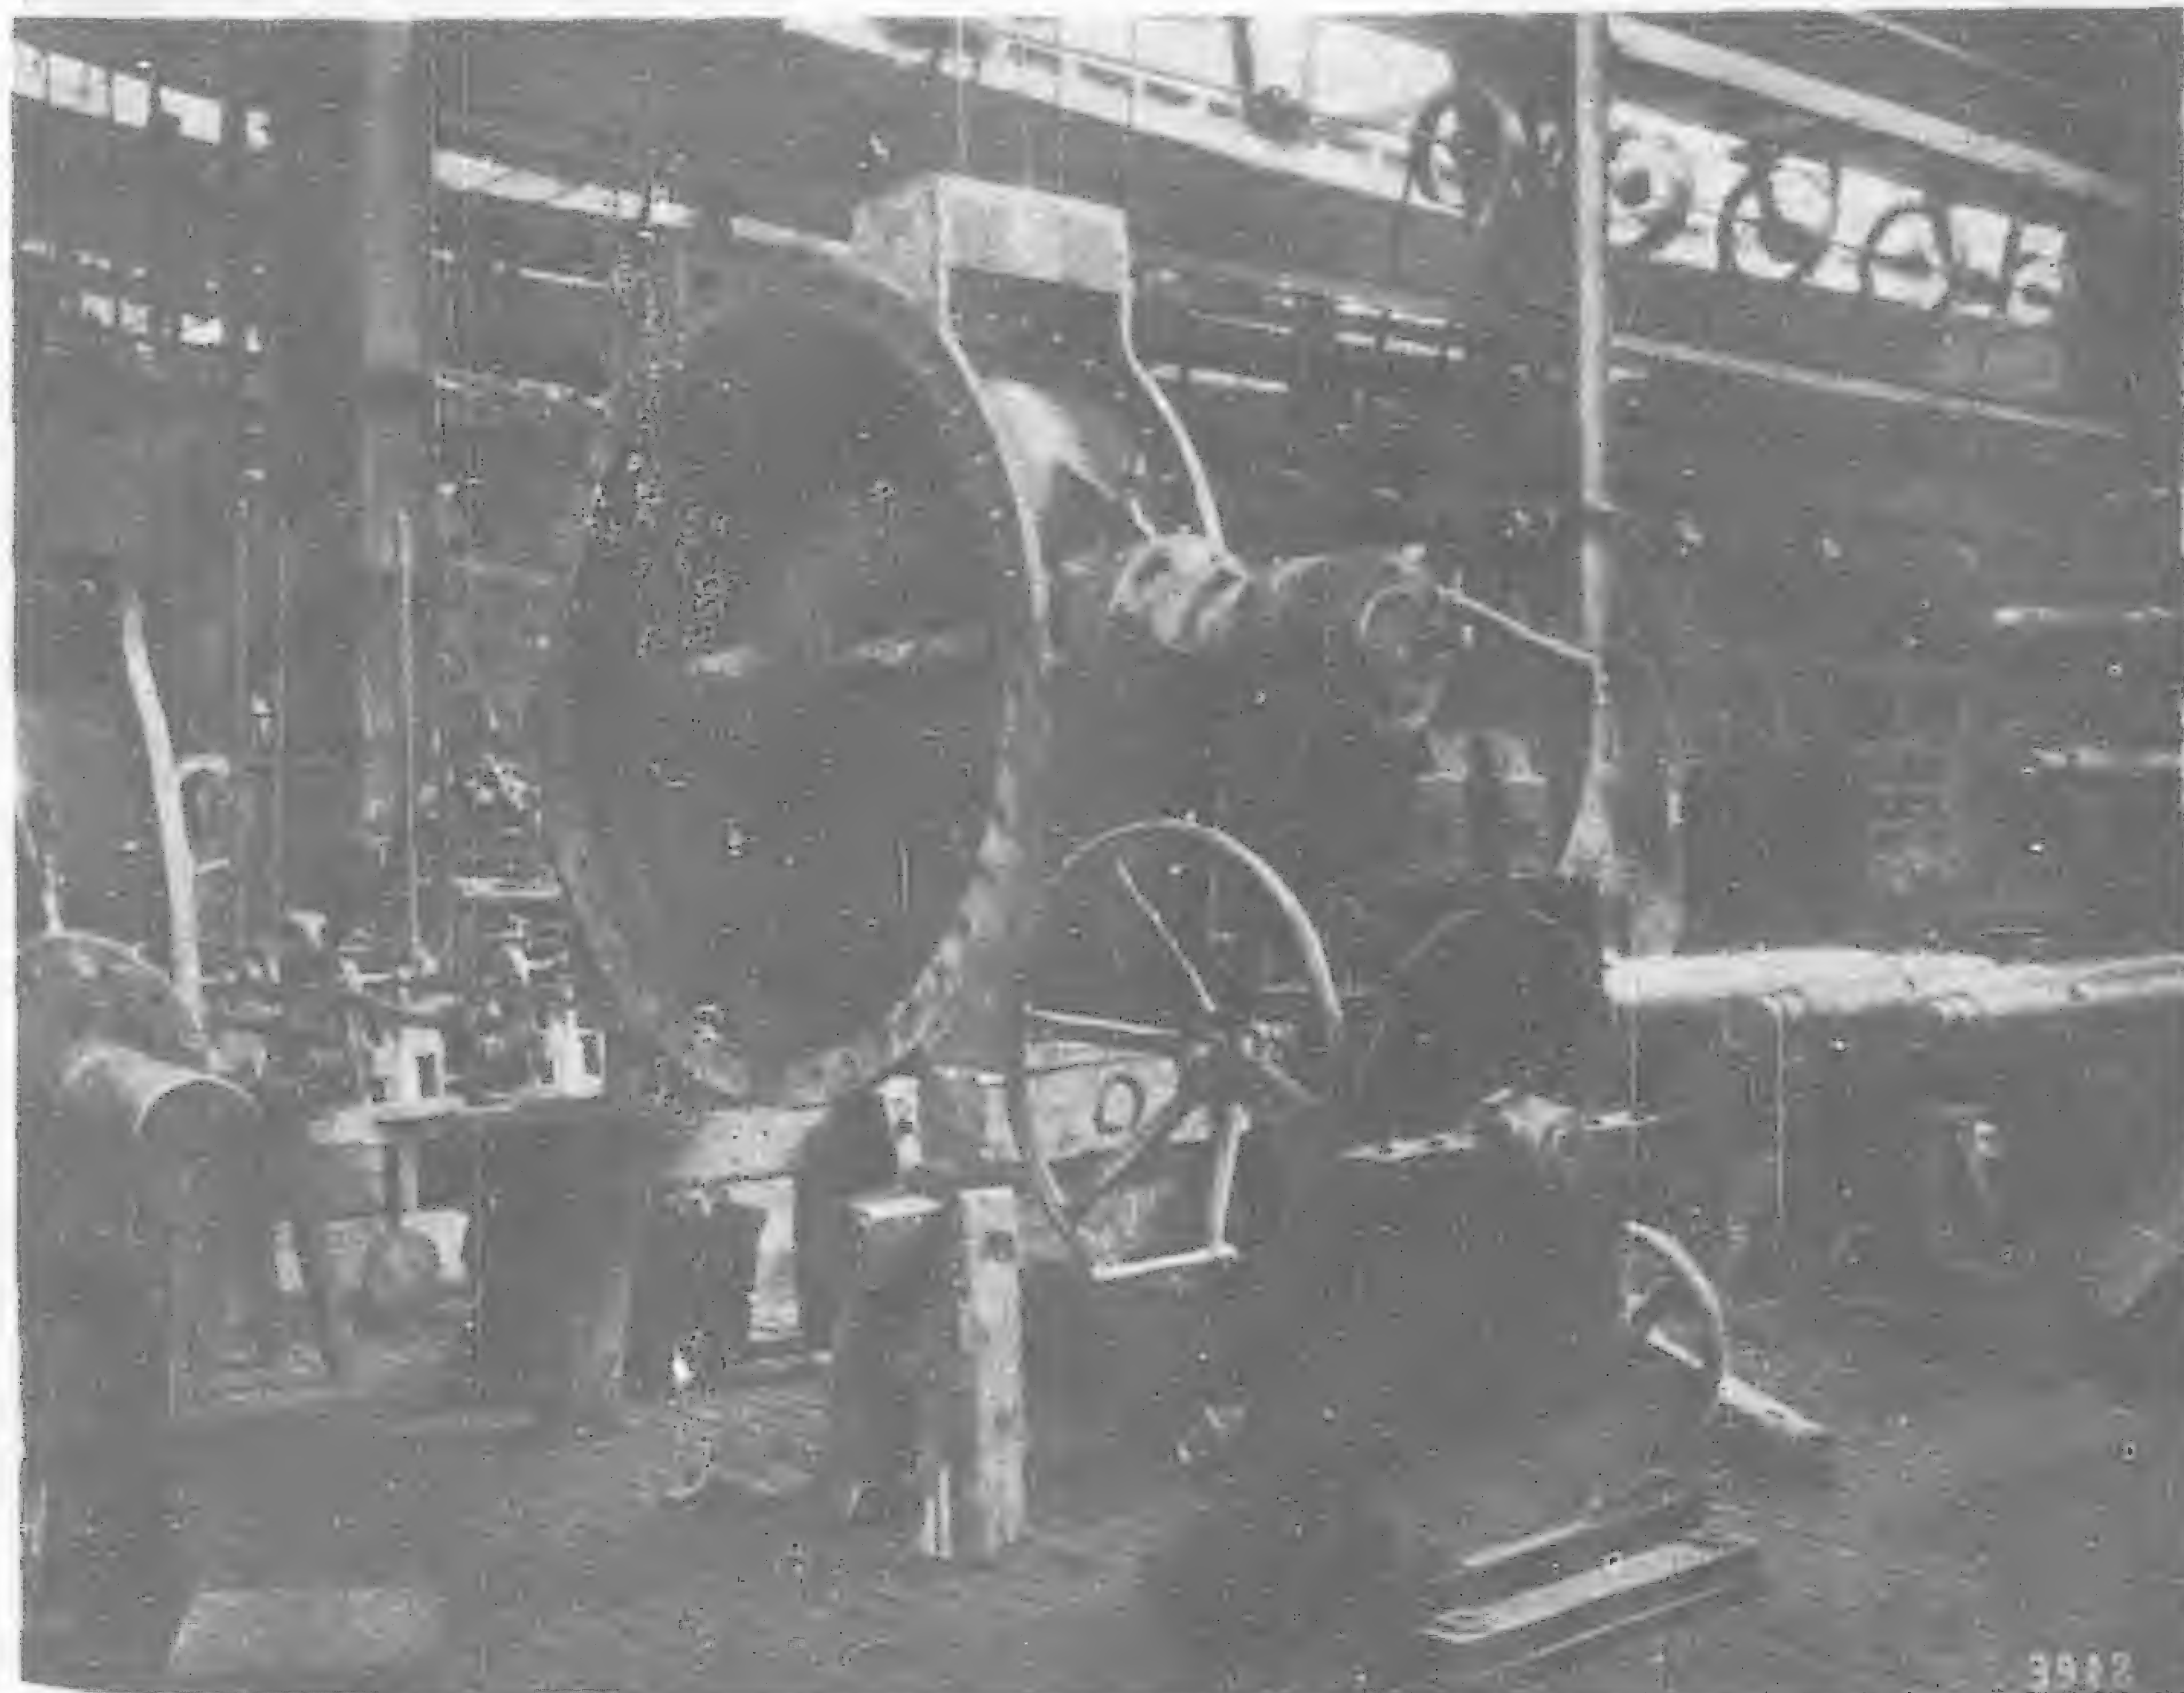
Voith Regulating Valves showing Upper Valve which can be Opened or Closed either by Hand or by Electric Motor with Spur Gear and Worm Gear
